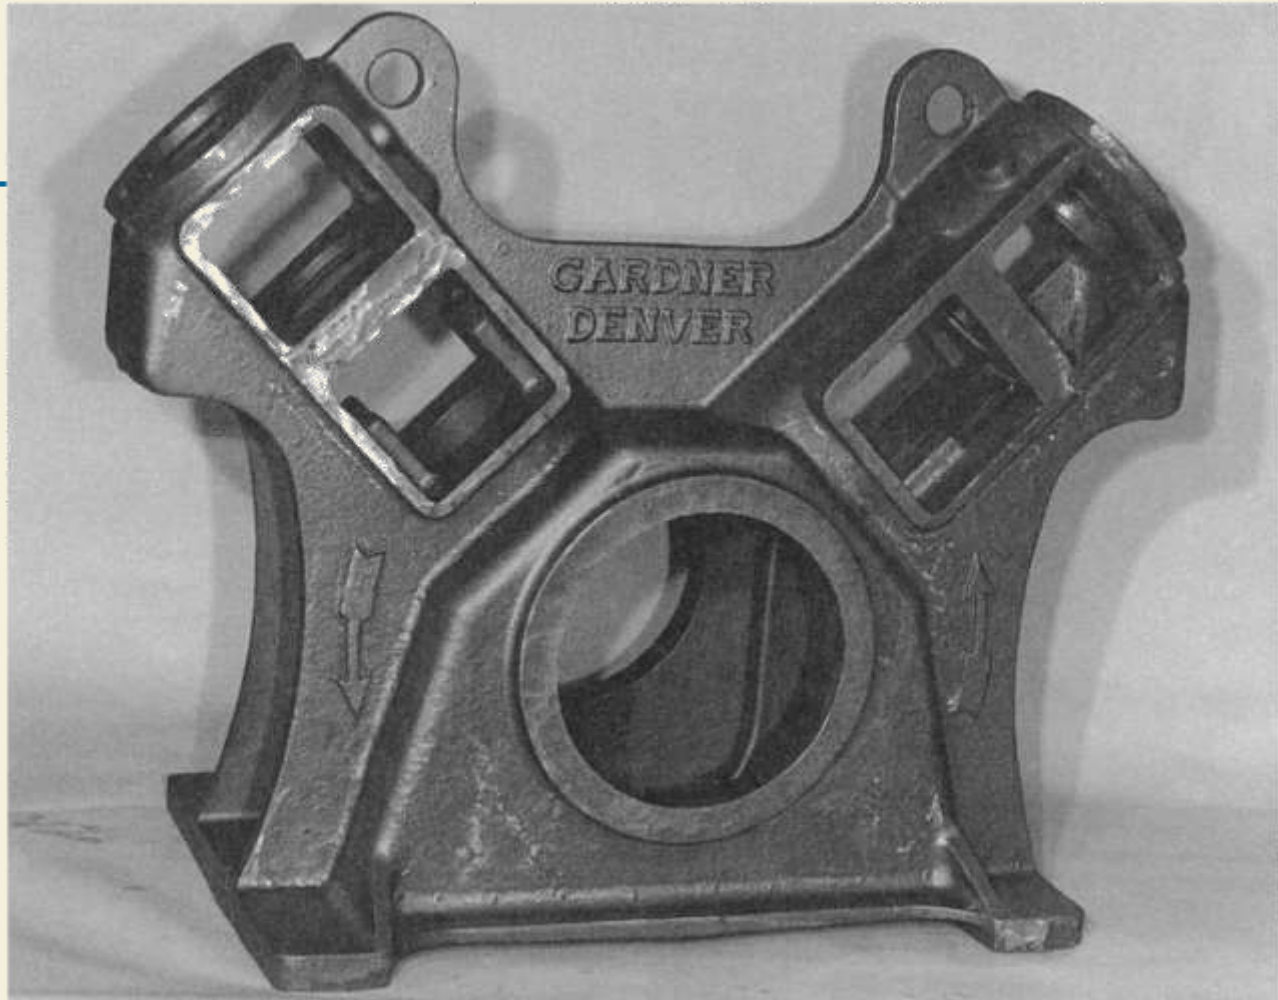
A large sand casting weighing over 680 kg (1500 lb) for an air compressor frame (photo courtesy of Elkhart Foundry).
